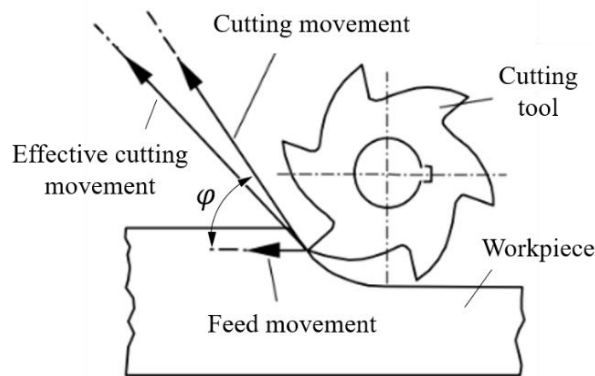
Movements between the cutting tool and the workpiece [15]
